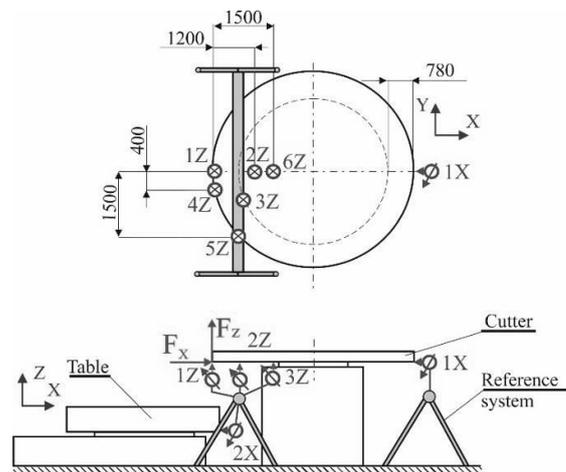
Scheme of the measurement system used for investigation of a milling machine FS-550CNC
